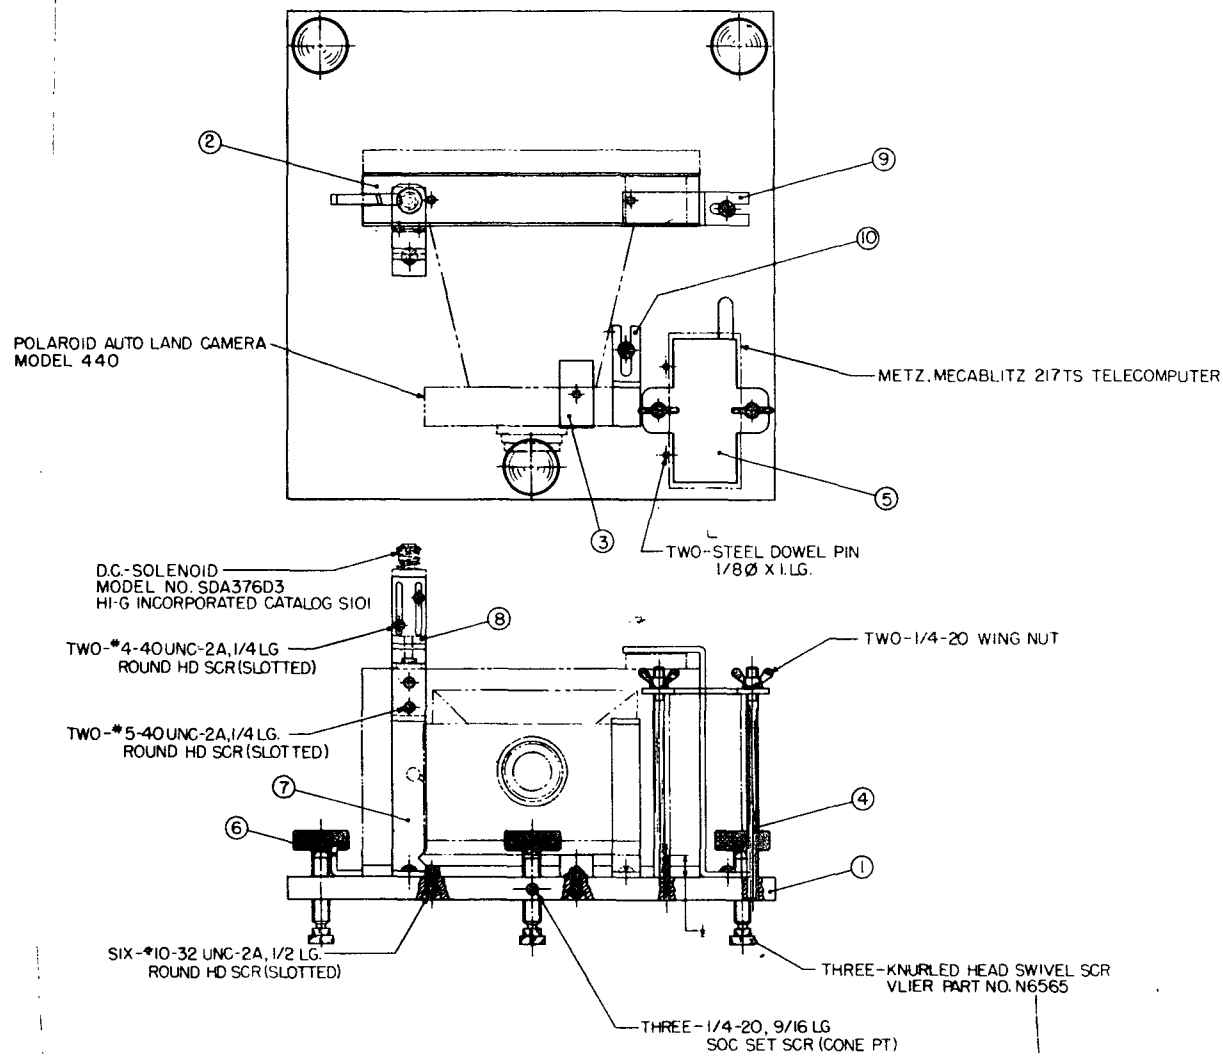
Camera/Flash Assembly-Frankford Arsenal Drawing No. 8649075
